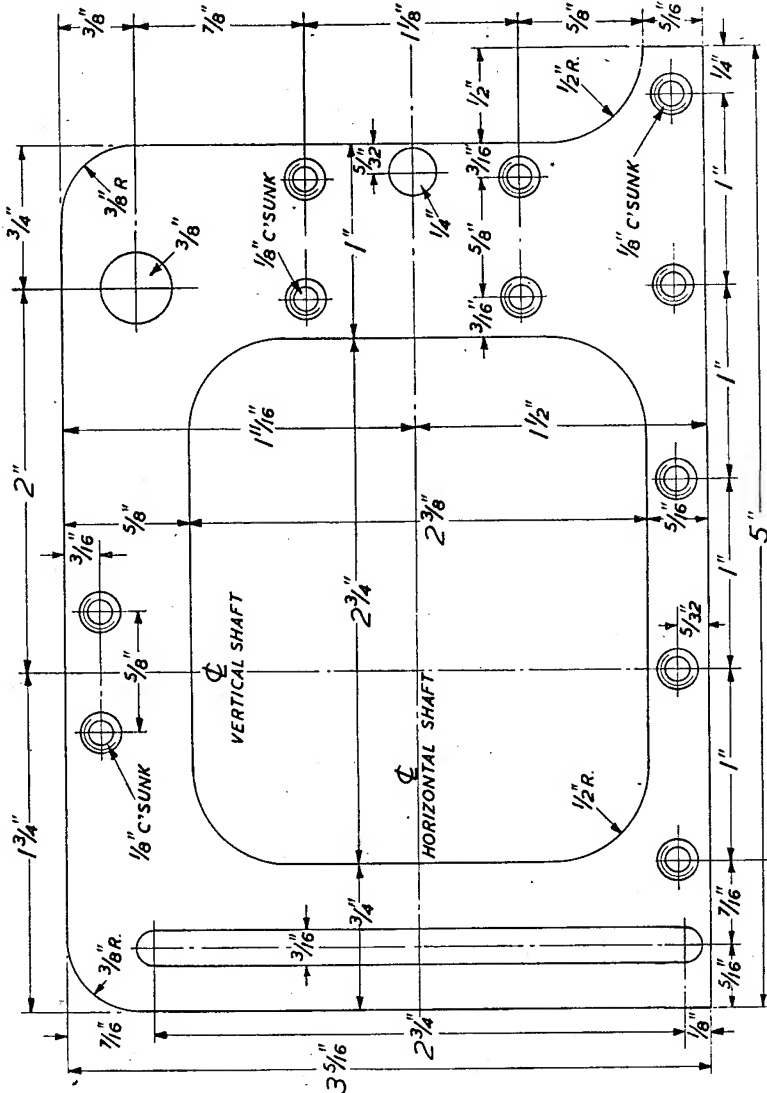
Outline of side frame plates of transmission gear for "1831."
